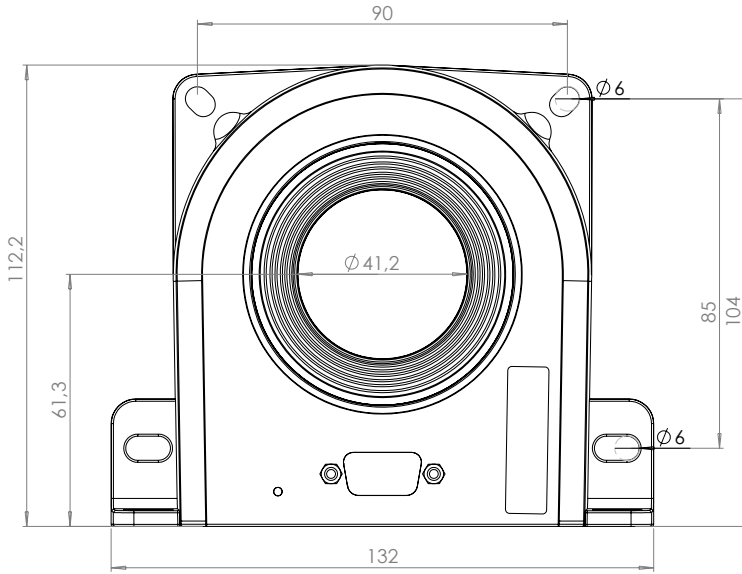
Dimensions of transducer. 0.3 mm Tolerance
